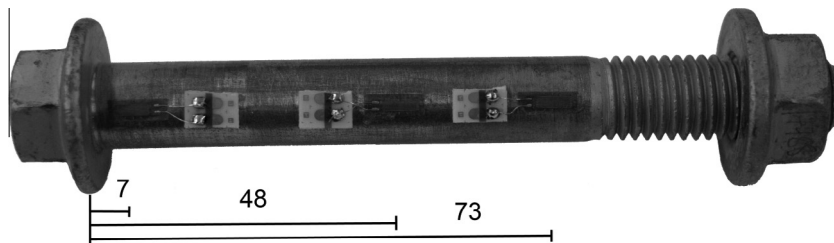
An instrumented specimen of bolt and nut with positions of the strain gauges indicated.
